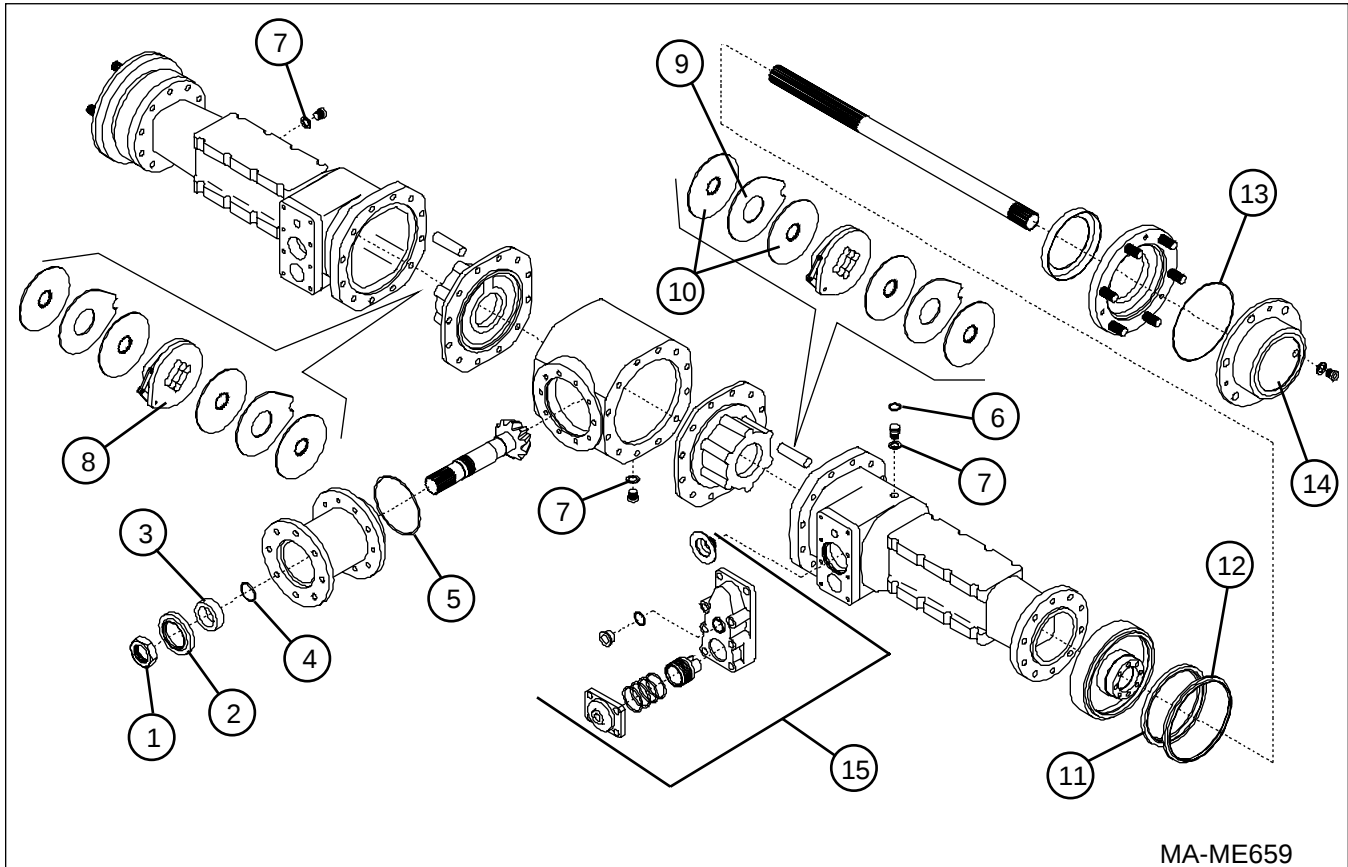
PLANETARY REDUCTION GEAR ASSEMBLY (Sige)
